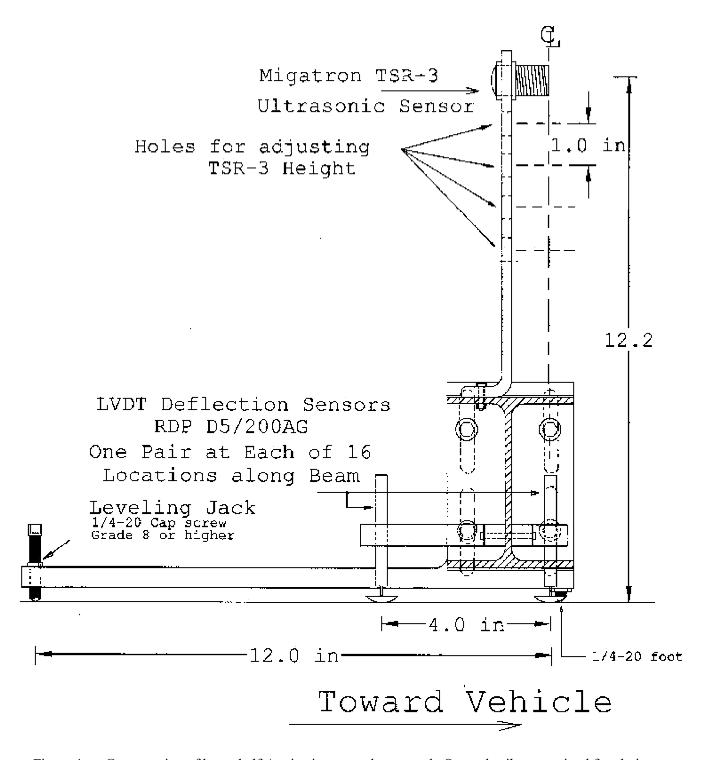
Cross section of beam half A, viewing toward outer end. Some details are omitted for clarity.
